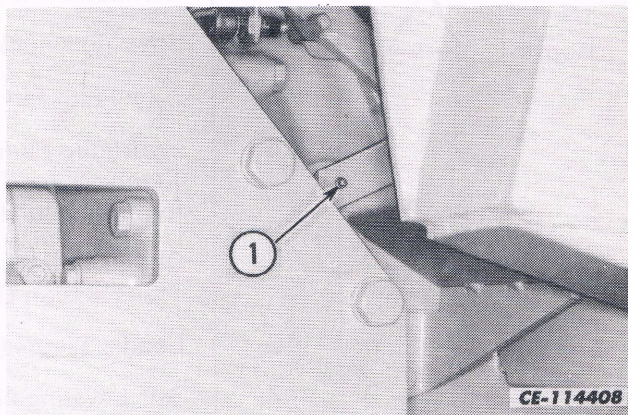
L.H. Clutch Release Shaft Lubrication Fitting
